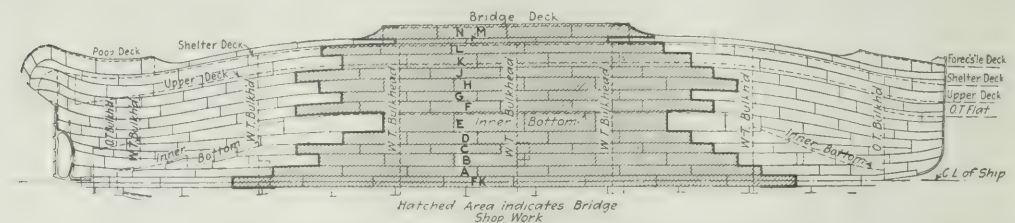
SHELL EXPANSION; SHADED AREA SHOWS BRIDGE-SHOP WORK
